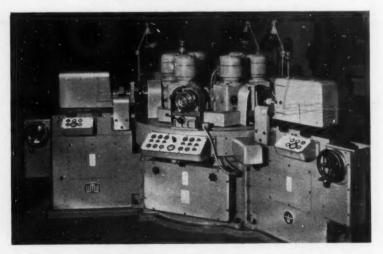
Rotary Transfer Machine for Carrying-out Face Grinding Operations on a Planetary Gear Component
